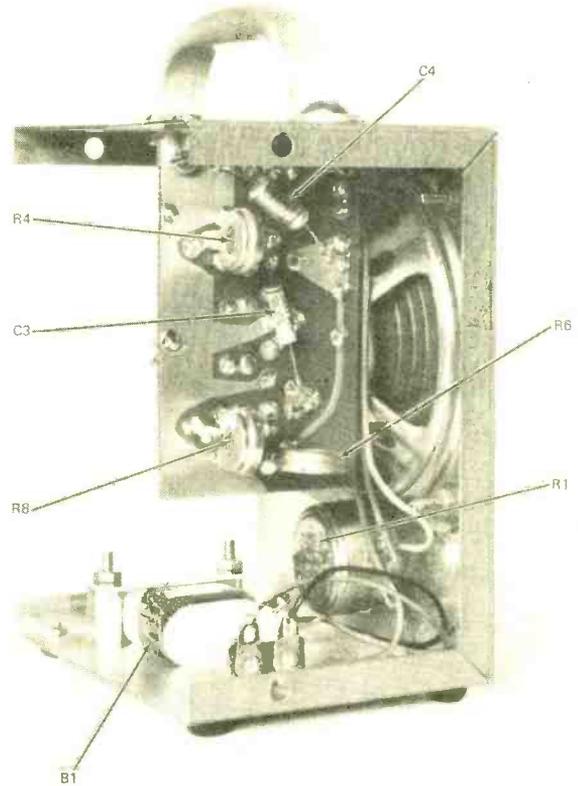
COMPONENT LAYOUT from toll side of circuit board.
